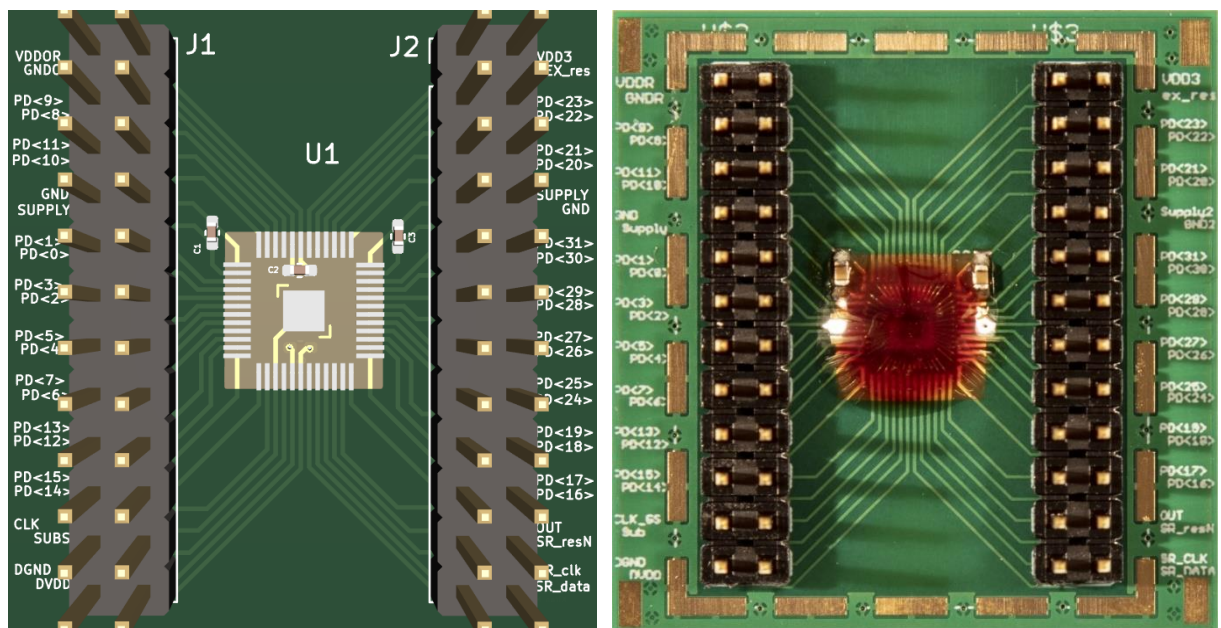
PCB Layout in KiCAD and the manufactured PCB
